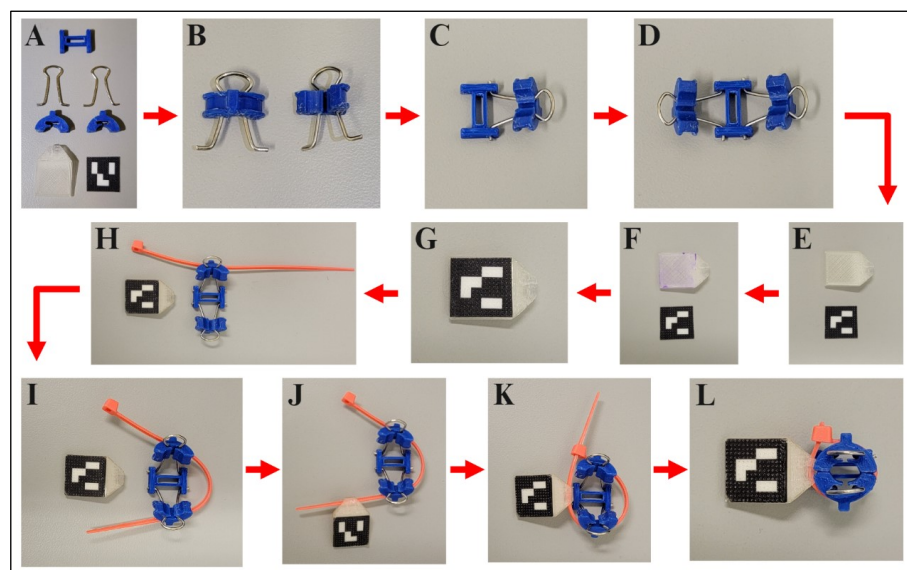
Instructions for connecting the ArUco marker mounting assembly. A) Gather each of the seven ArUco marker mounting pieces: (1×) I-Bracket, (2×) 5/8 in. binder clip wire loops, (2×) C-Clamps, (1×) ArUco marker mount, and (1×) 15 mm × 15 mm paper printed ArUco marker. B) Pinch the binder clip wire loops together to slot them into the C-Clamps. C) With your index finger and thumb, slide the C-Clamp down the binder clip wire loop until it almost reaches the protruding prongs at the end. Then, insert the prongs into the holes of the I-Bracket. D) Repeat the process described in panel C for the opposite side of the I-Bracket. E) Orient the ArUco marker mount and paper-printed marker as depicted in the image. The tip of the ArUco marker mount should slant down into the workspace surface. F) Place glue on top of the ArUco marker mount 15 mm × 15 mm square surface. G) Adhere the paper-printed marker to the ArUco marker mount. H) Place a 4 in. cable tie into the side hole of one of the C-Clamps. I) Wrap the cable tie around the assembly, threading it through the second C-Clamp hole. J) Slide the cable tie through the marker mount so that the marker is facing away from the assembly. K) Close the cable tie so that it is tightly bound around the assembly. L) Cut the excess length of the cable tie.
